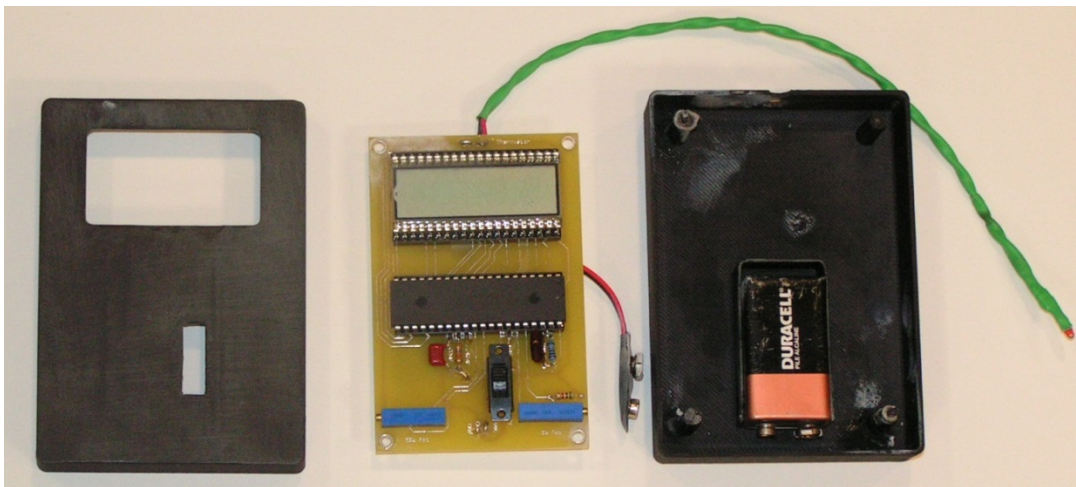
Exploded Assembly of the Temperature Sensor, Fall 2013.
